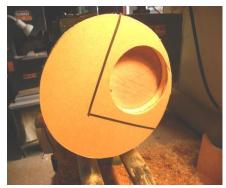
Now take the small square piece and line it up in position on the L shaped jig using your checking points as a guide. Draw a line inside the 115mm hole, remove the piece and decide where to drill three holes for fixing screws. Screw the square in place, cut off the corners and mount on the lathe and turn the outside down to a round. This size is not critical except do not break in to the 115mm circle.
